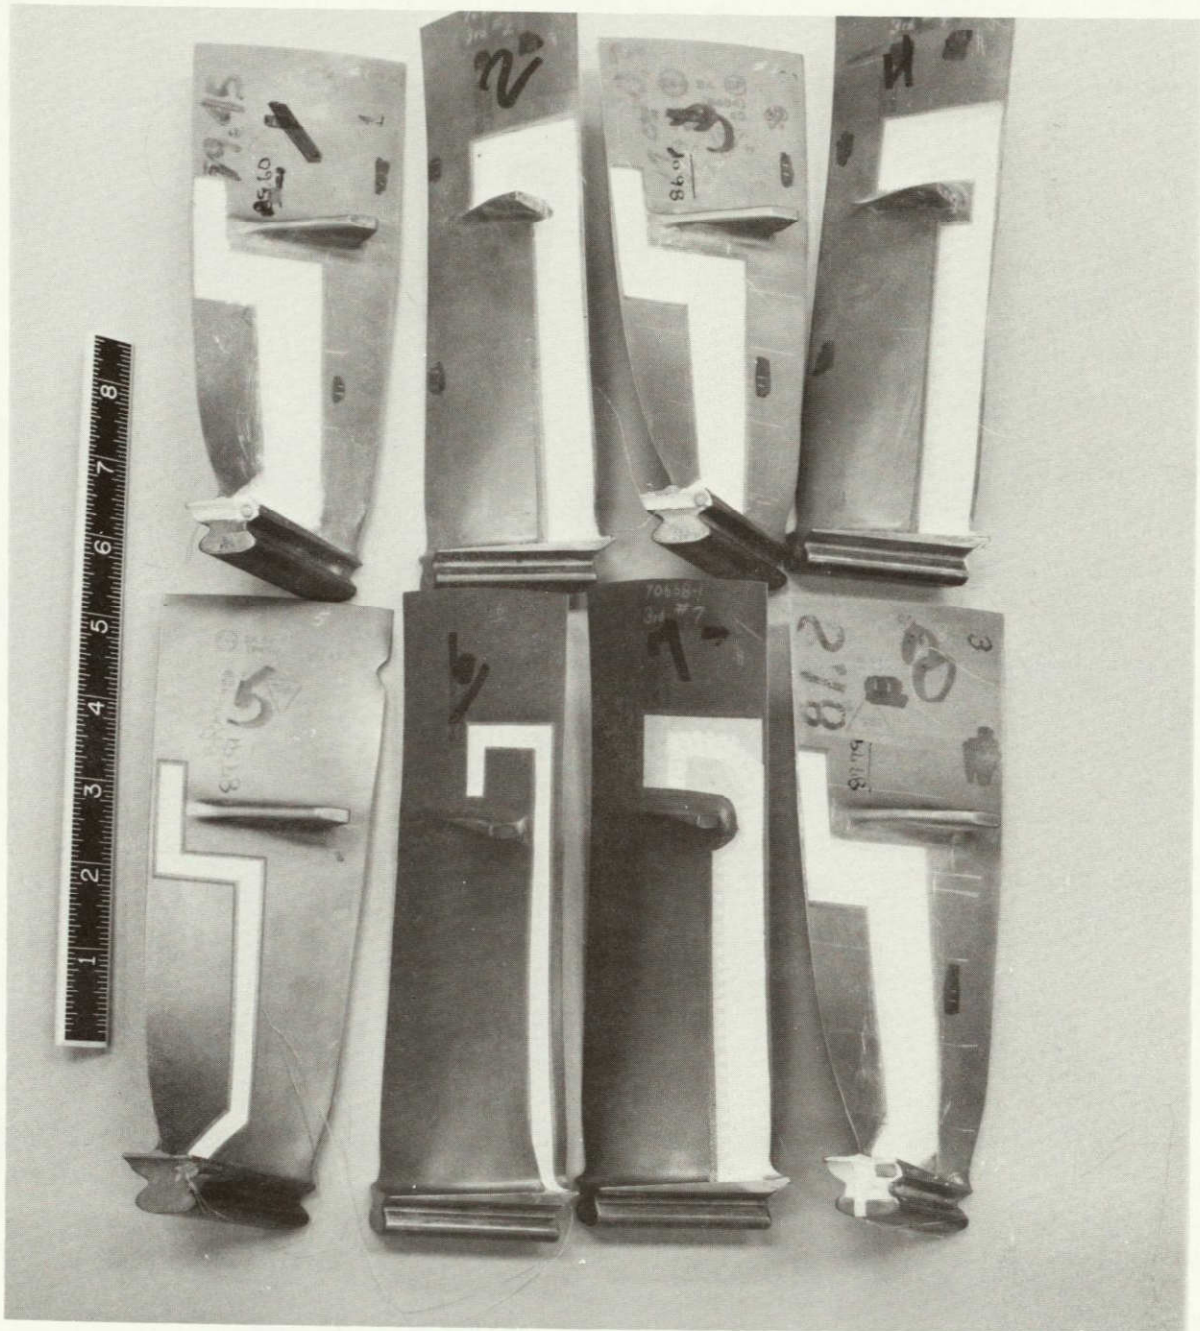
Instrumented Third Stage Blades S/N 1 Through 8 Before Testing (77-444-4001-A)
